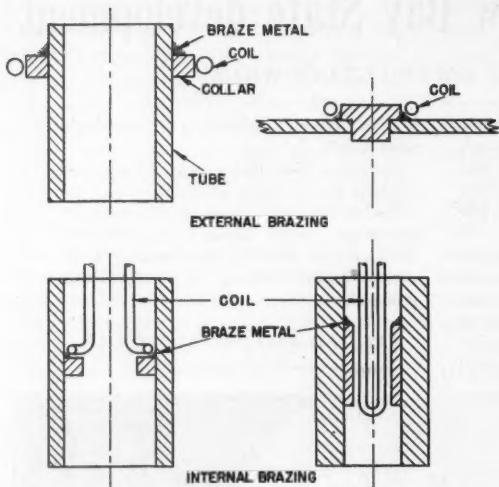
Cross-Section Drawing Illustrating Placement of Coils for External and Internal Brazing.
